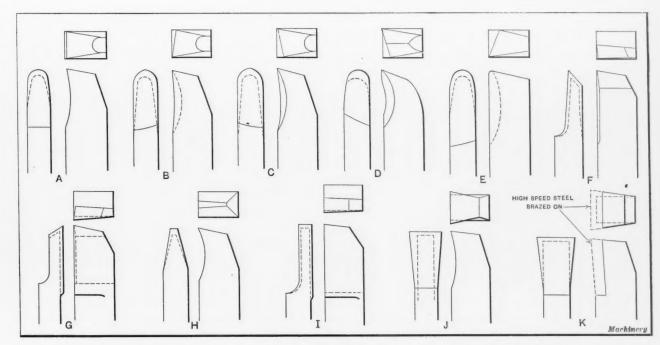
(A) Roughing Tool feeds right to left or left to right; (B) Roughing Tool feeds left to right; (C) Roughing Tool feeds right to left; (D) Roughing Tool feeds right to left; (E) Roughing Tool feeds left to right; (F) V-bearing Finishing Tool made Right- and Left-hand; (G) Dovetail Finishing Tool made Right- and Left-hand; (H) Rough Beveling Tool; (I) Tool for finishing up to a Shoulder, made Right- and Left-hand; (J) Roughing Tool for Use with Vertical Feed; (K) Same as J, but with Brazed High-speed Bit. On All these Tools, Clearance behind Cutting Edge, 6 Degrees, and Side Clearance, 4 Degrees
